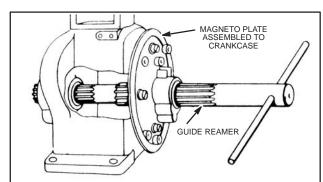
REAMING MAGNETO BEARING (LINE REAMING)
